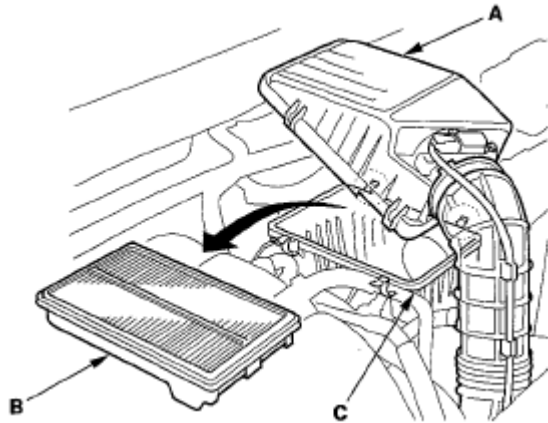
Removing Air Cleaner Housing And Air Cleaner Element
